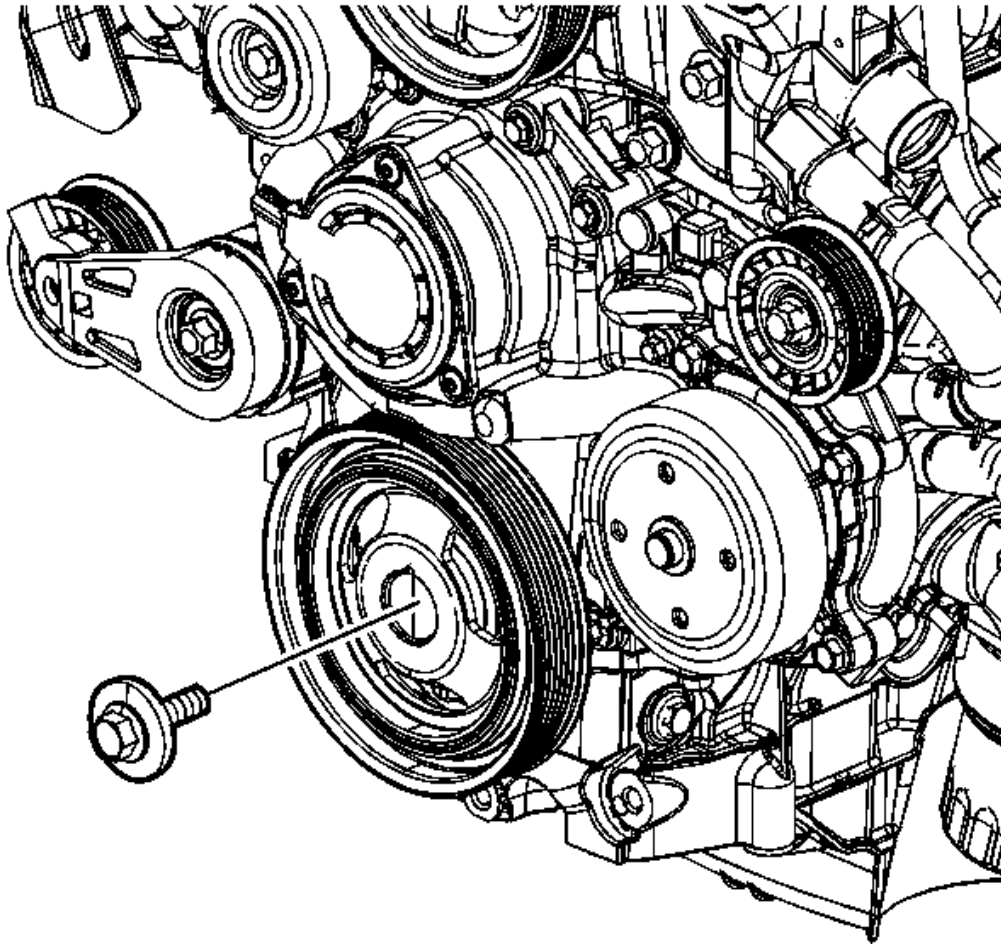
Identifying Crankshaft Balancer Bolt & Washer
